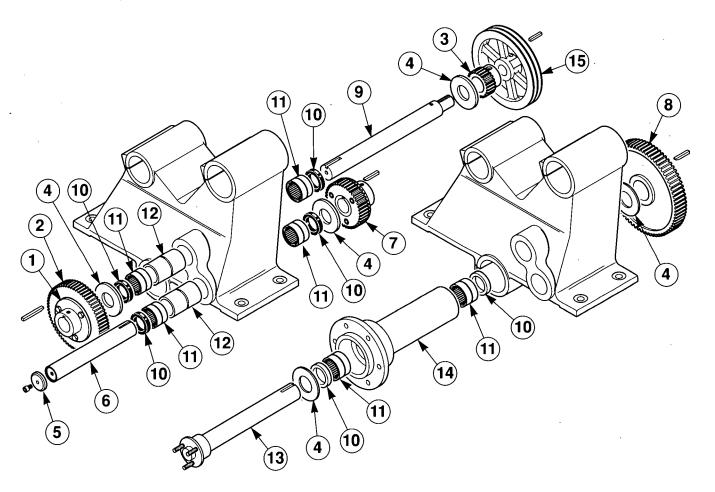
Drive Train. (1) Gear Hub, (2) Gear, Main Drive Shaft, (3) Small Gear, Main Drive Shaft, (4) Thrust Washer, (5) Retaining Washer, (6) Jack Shaft, (7) Gear, Jack Shaft, (8) Gear, Impeller Shaft, (9) Main Drive Shaft, (10) Oil Seal, (11) Roller Bearings, (12) Bearing Spacer, (13) Impeller Shaft, (14) Bearing Housing, (15) Drive Pulley.
